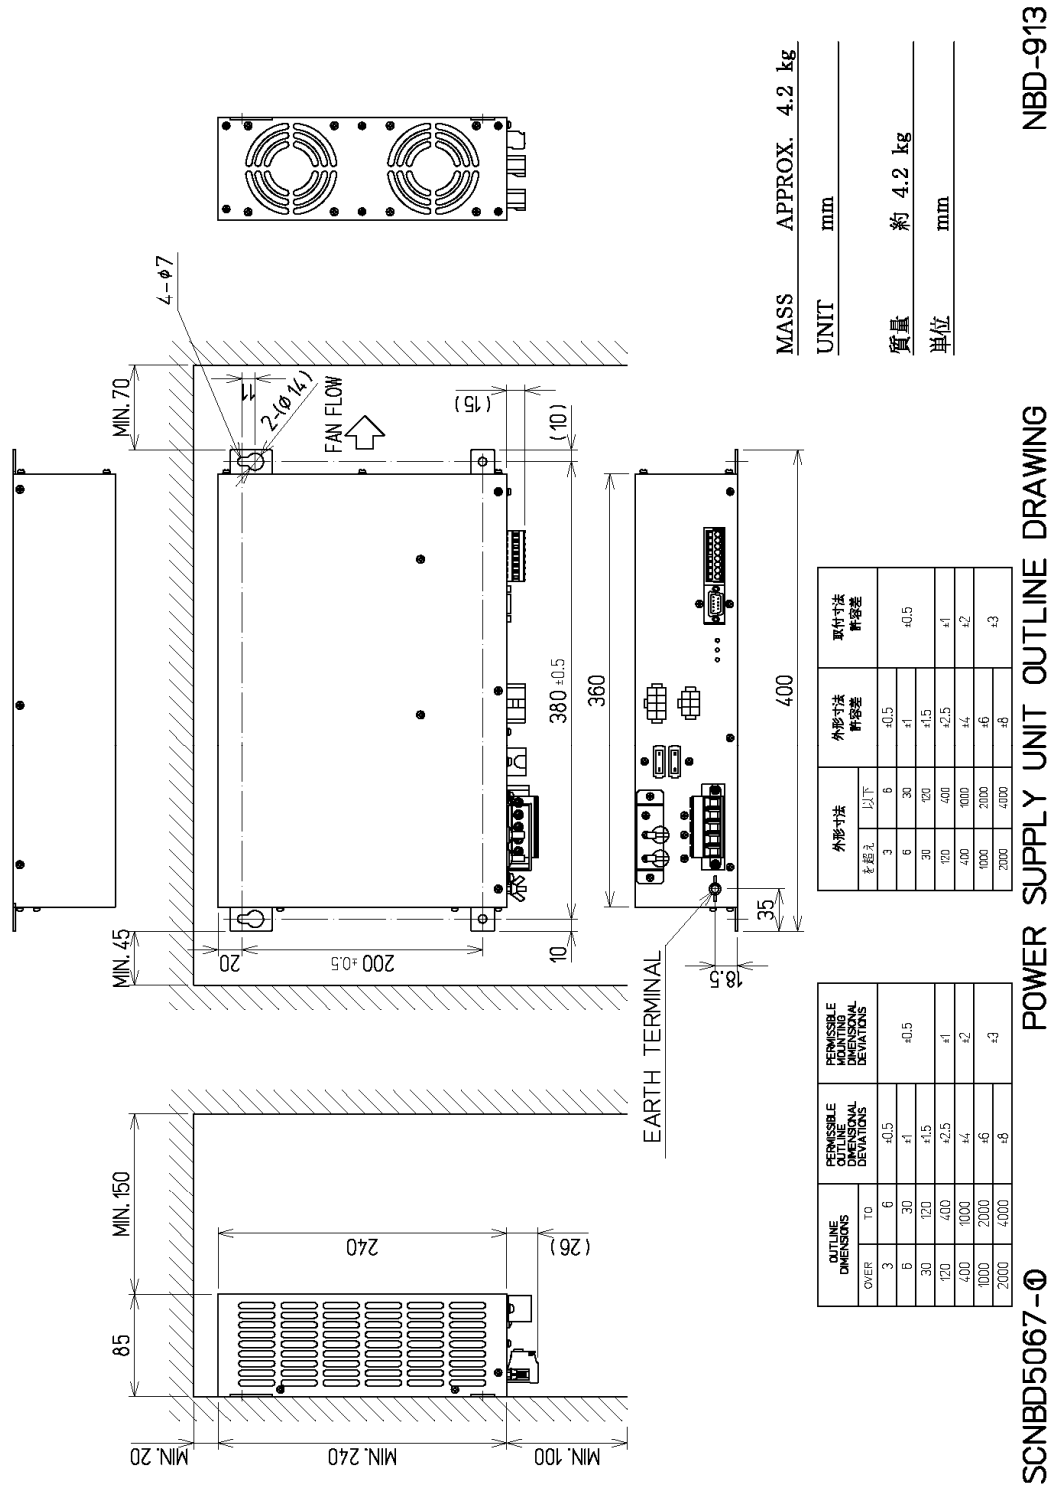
Outline Drawings of NBD-913 Power Supply Unit
